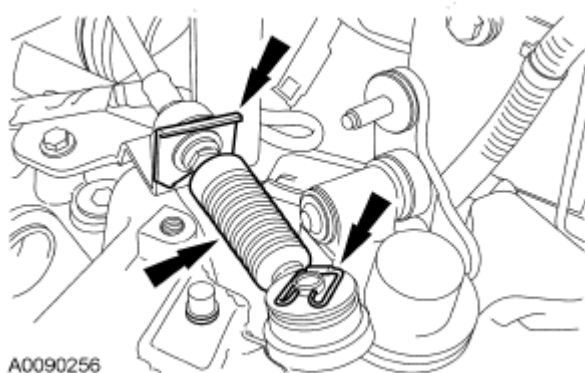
Locating Transaxle Control Cable (2 Of 2)
